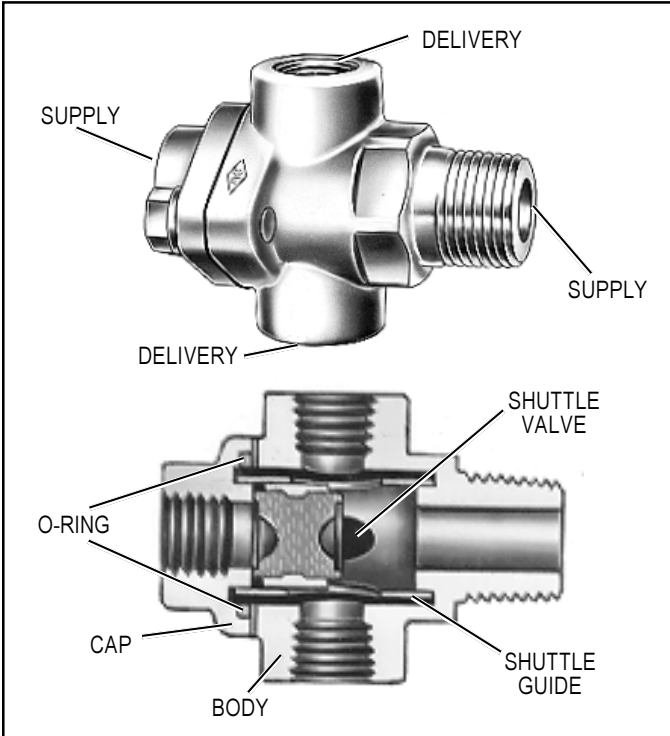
DOUBLE CHECK VALVE (SHUTTLE TYPE)
